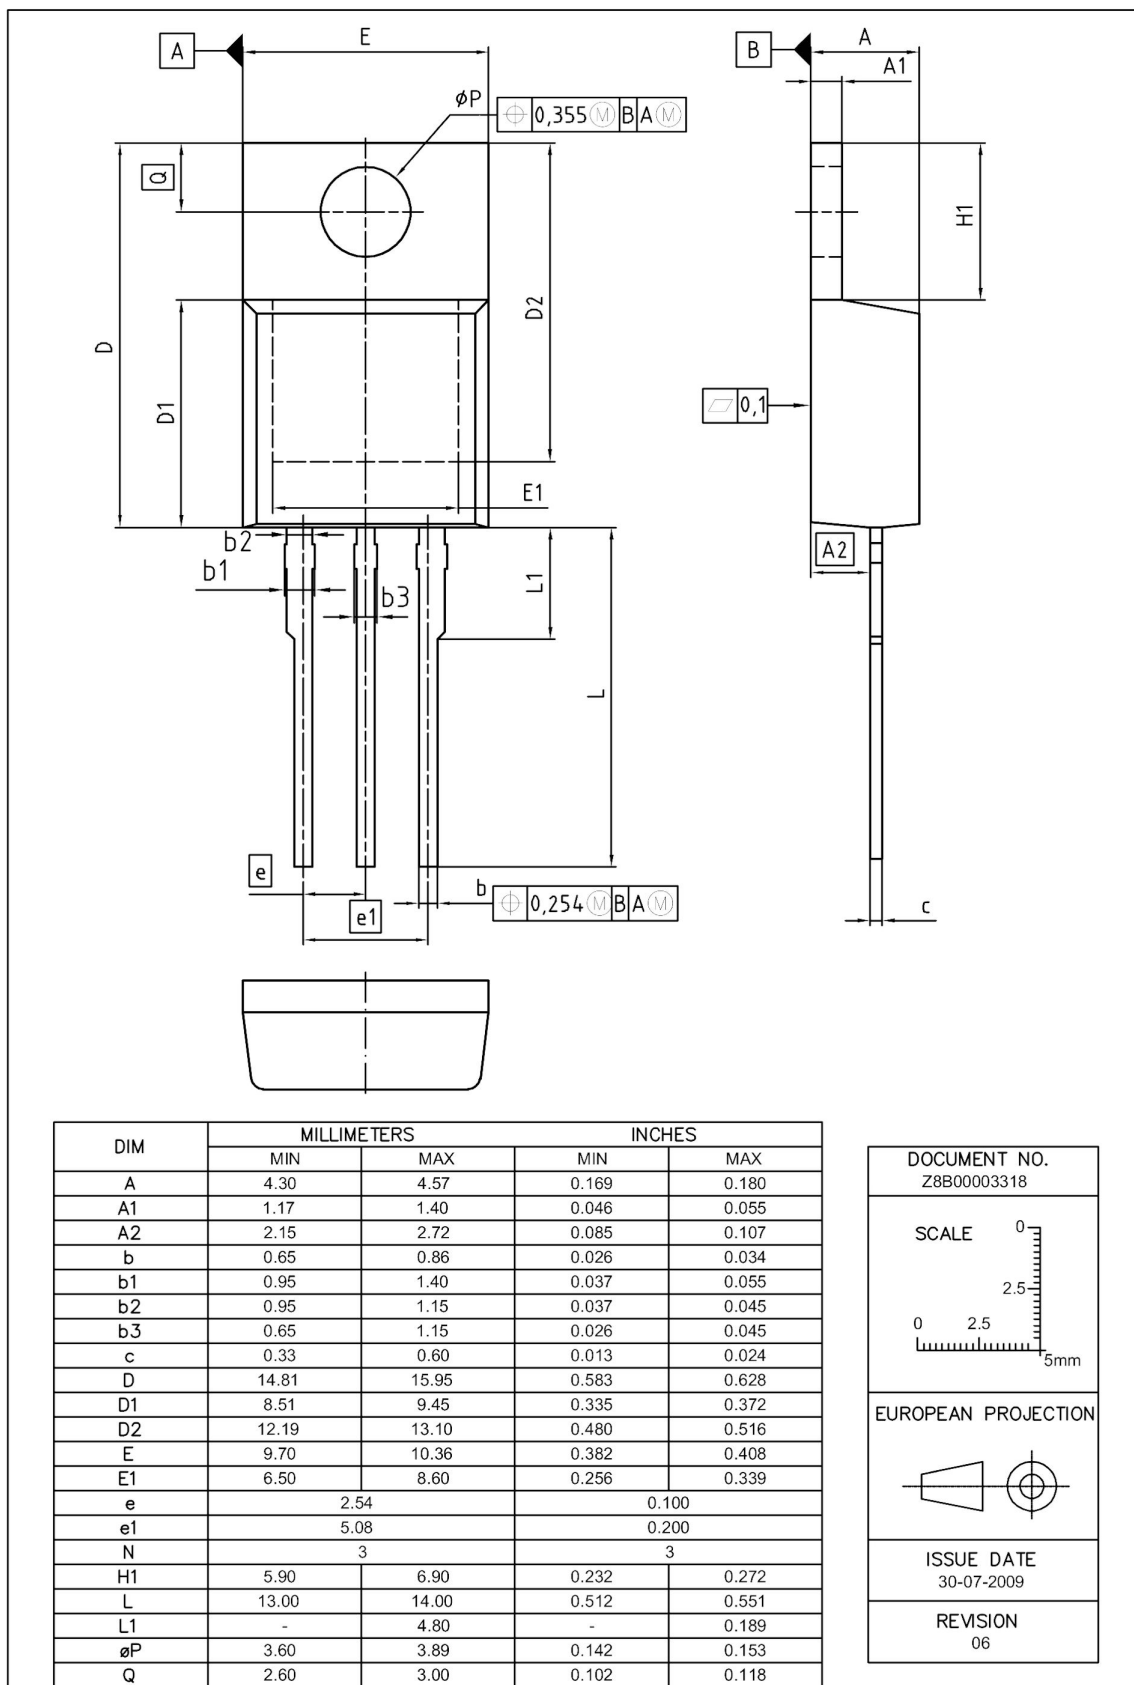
Outline PG-TO 220, dimensions in mm/inches
